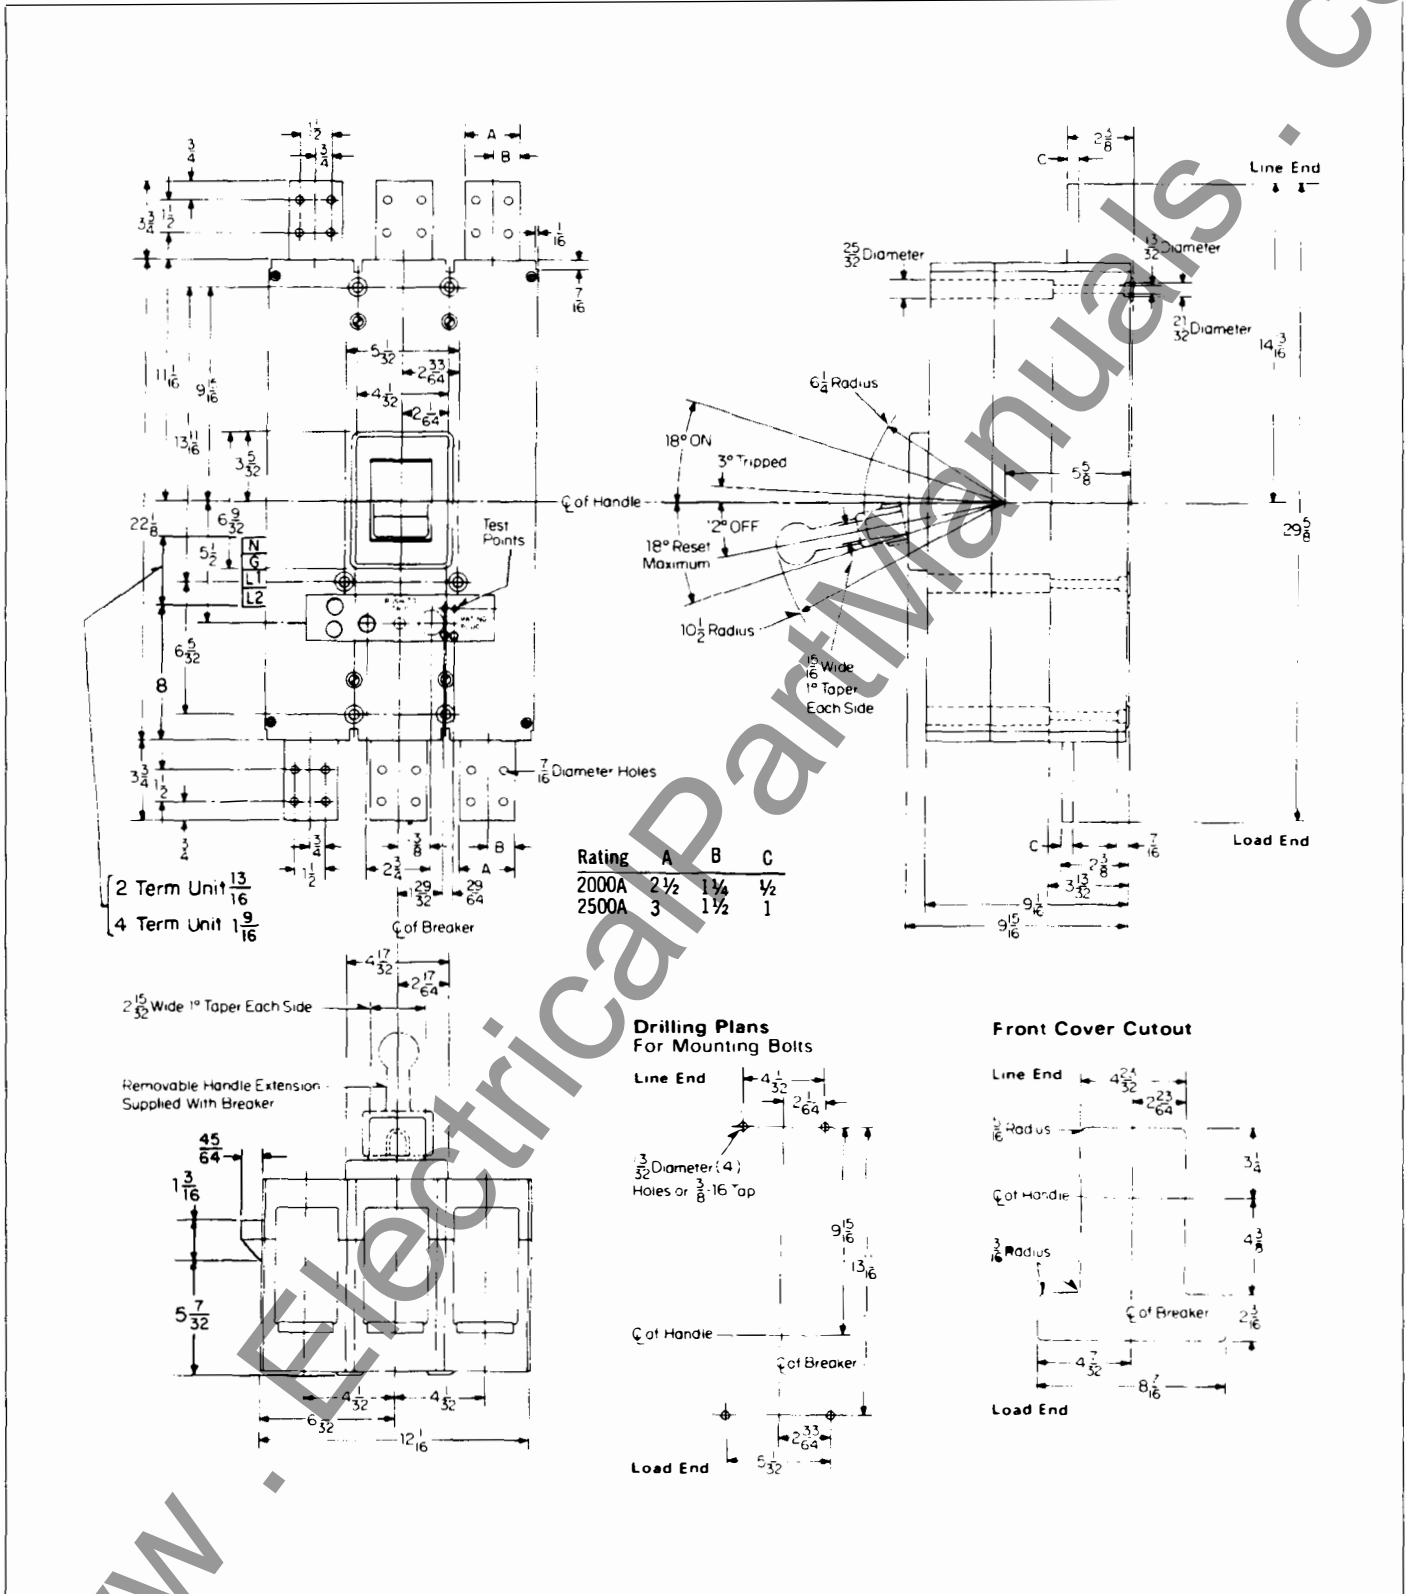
Outline Dimensions for Fixed Mounted, Front Connected PCF-2000 and PCF-2500 SELTRONIC Breakers
